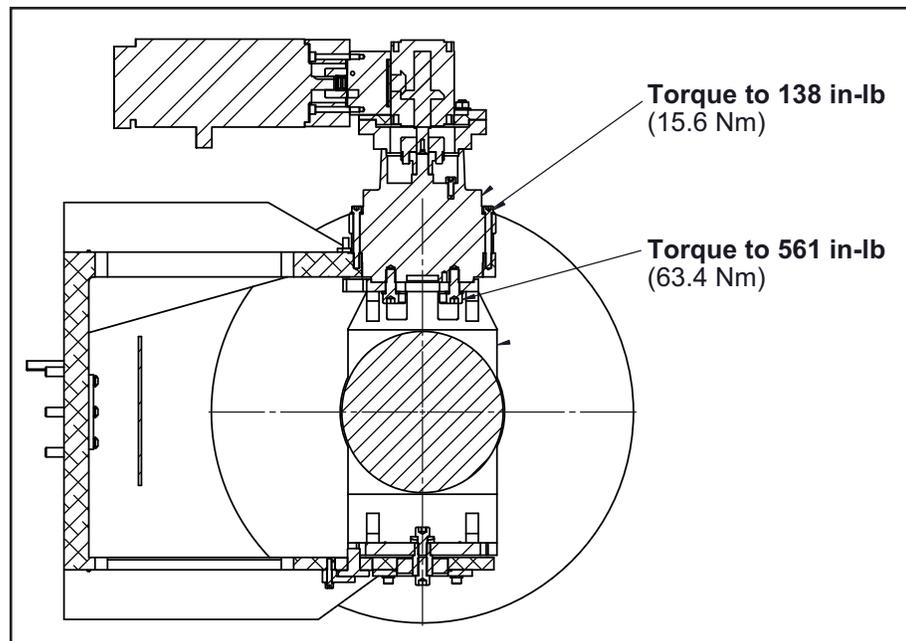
Torque Specs When Replacing Blade Gearbox
